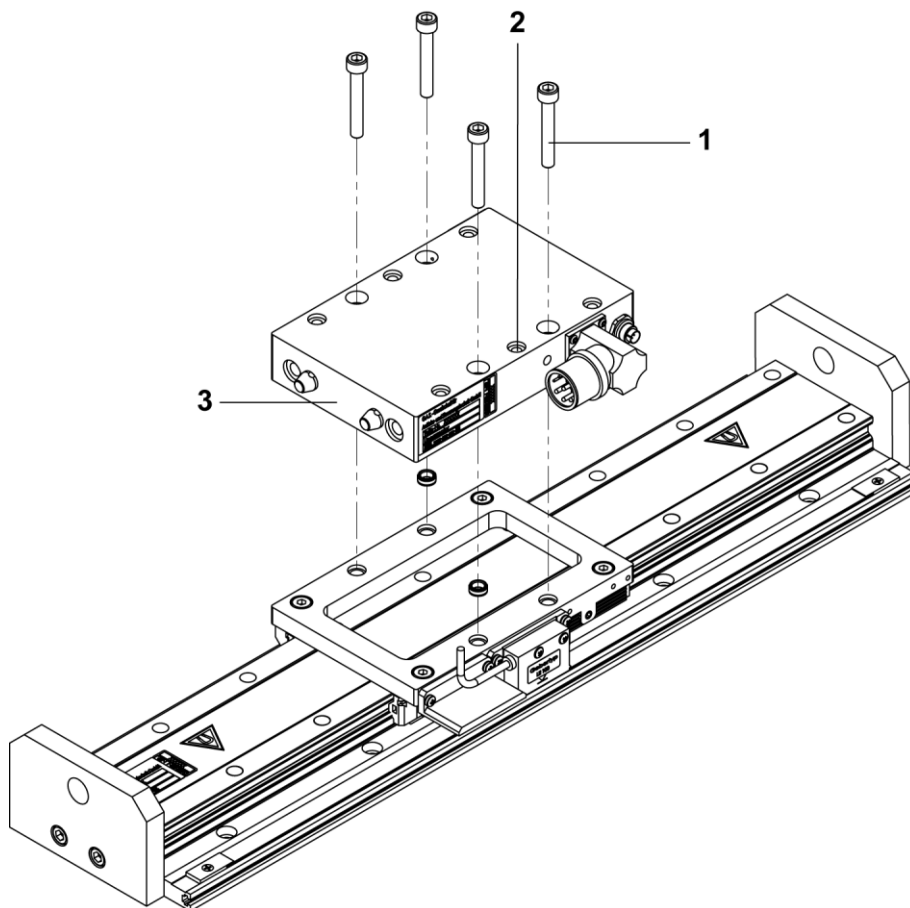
Changing the motor housing of a linear motor drive MLD type FU
